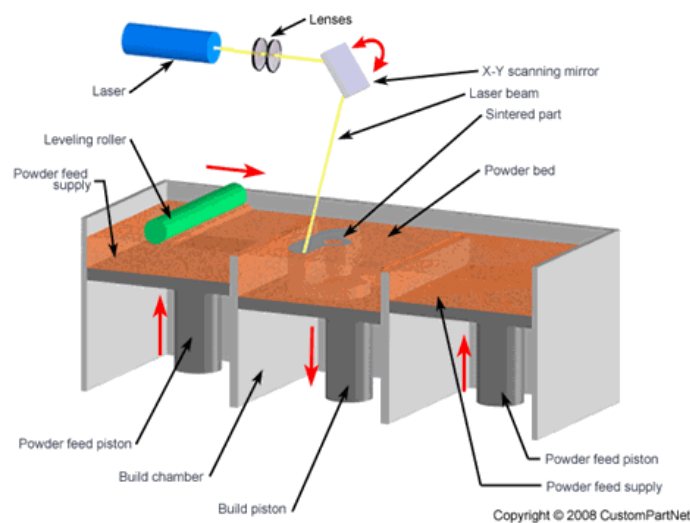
Schematic drawing of the Selective Laser Sintering (SLS) process. A powder is sintered by a laser to form a 3D object.^[1].
